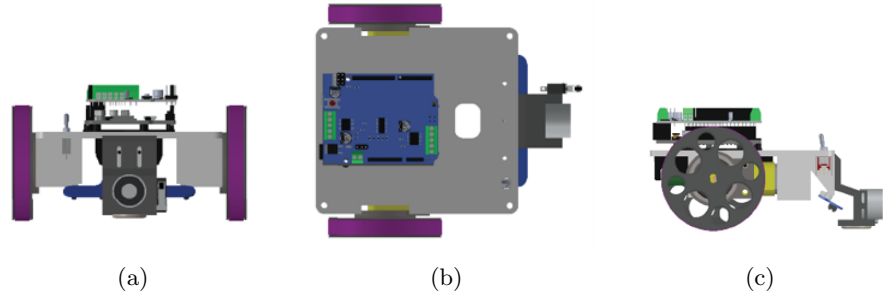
Views of the Robot: (a) Front View, (b) Top View, (c) Right Side View.
